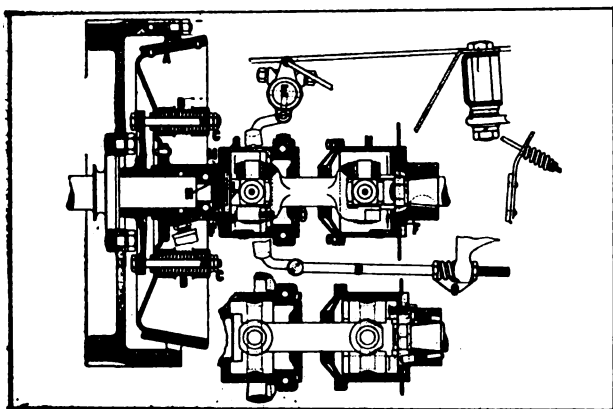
Sectional View of Cadillac Clutch with Components Lettered to Aid in Its Dismantling and Re-assembly.
